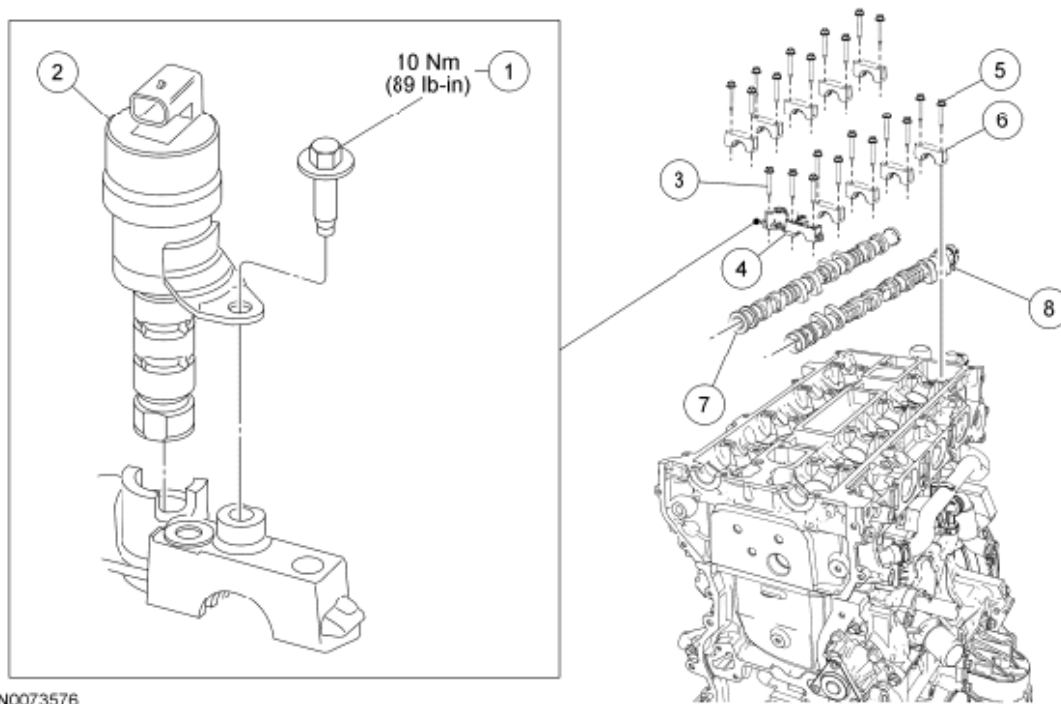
Exploded View Of Camshafts Components With Torque Specifications
